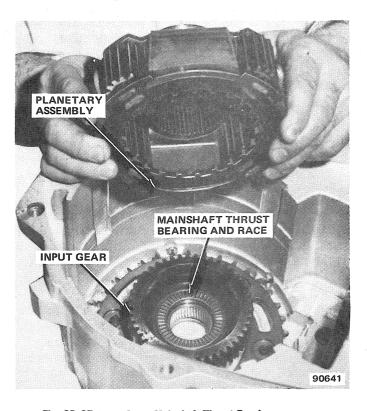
D-37 Input Gear, Mainshaft Thrust Bearing and Planetary Installation
